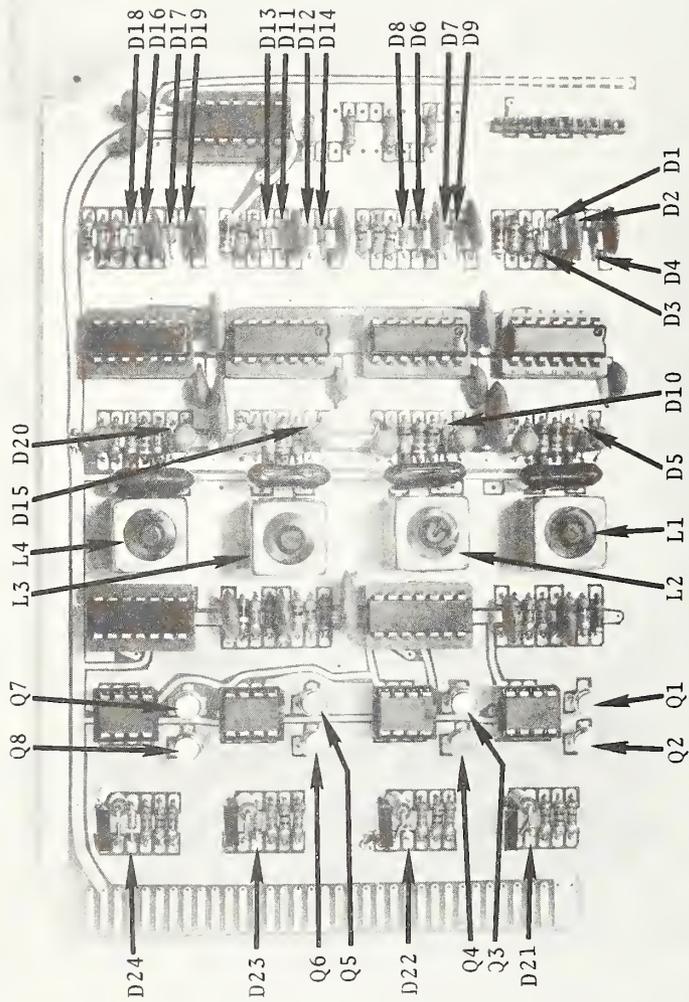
Agc Amplifier Board (PCB 1,2,3), Parts Location (Diodes, Filters, Transistors)
